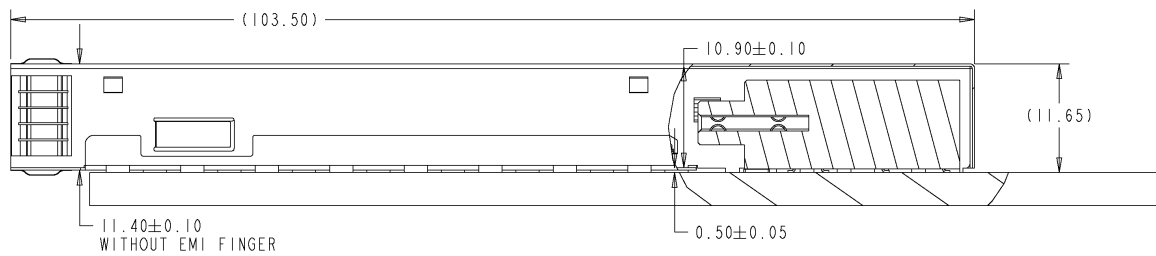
Overview of the cage and host PCB (no riding heatsink)
